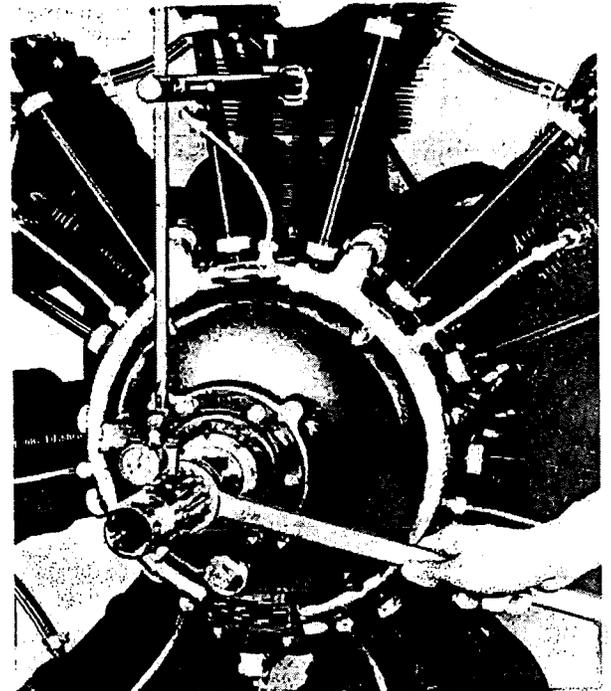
Checking Propeller Shaft Runout with Dial Indicator
